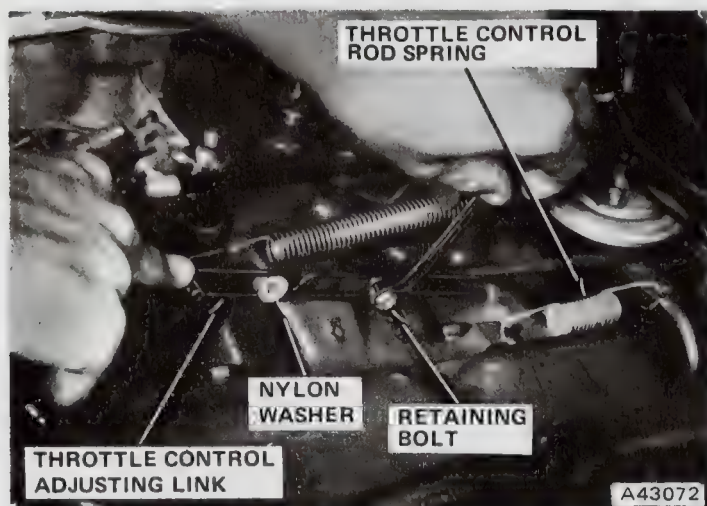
C-30 Tightening Link Retaining Bolt—Eight-Cylinder Engine
